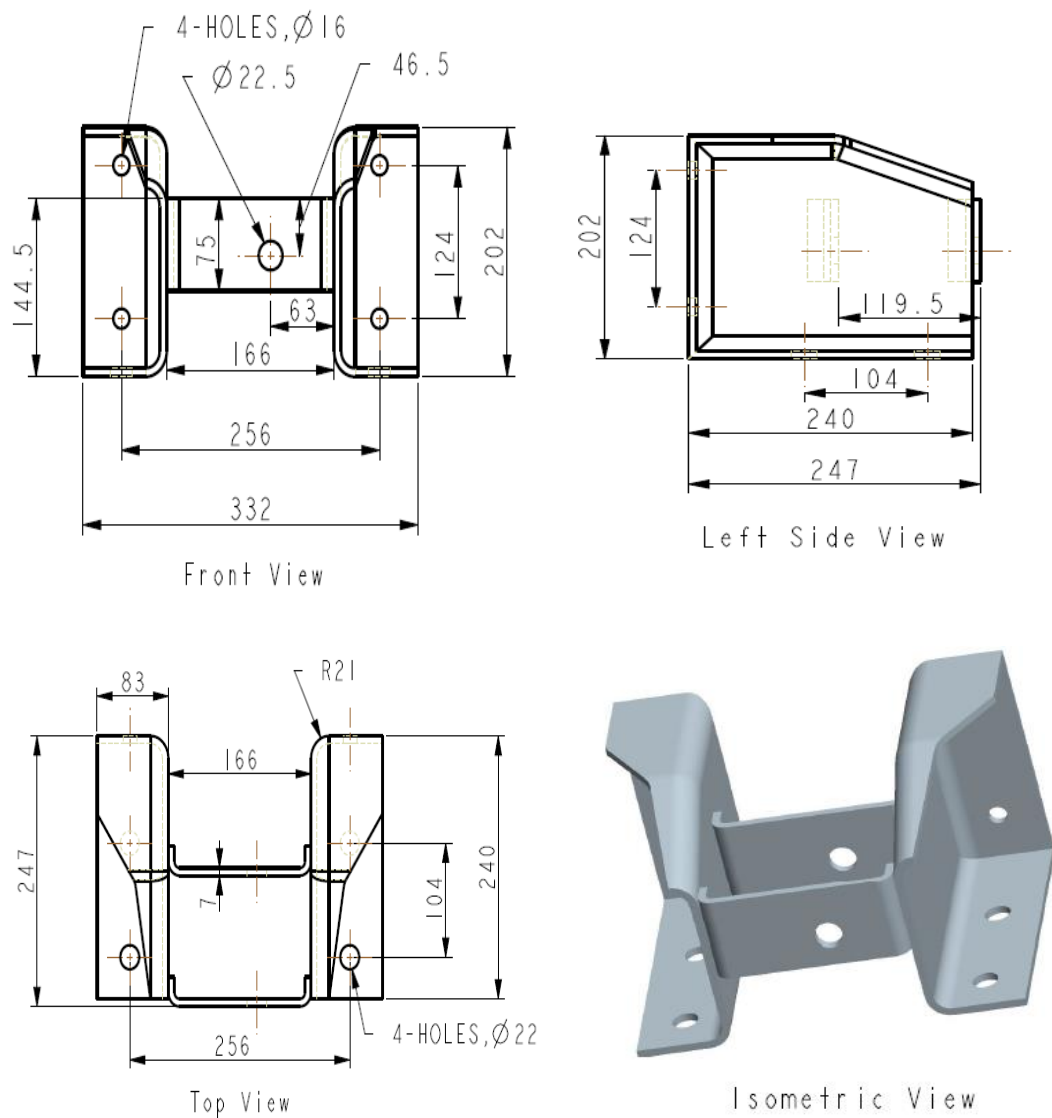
Chassis mounted bracket Dimensions (mm)
